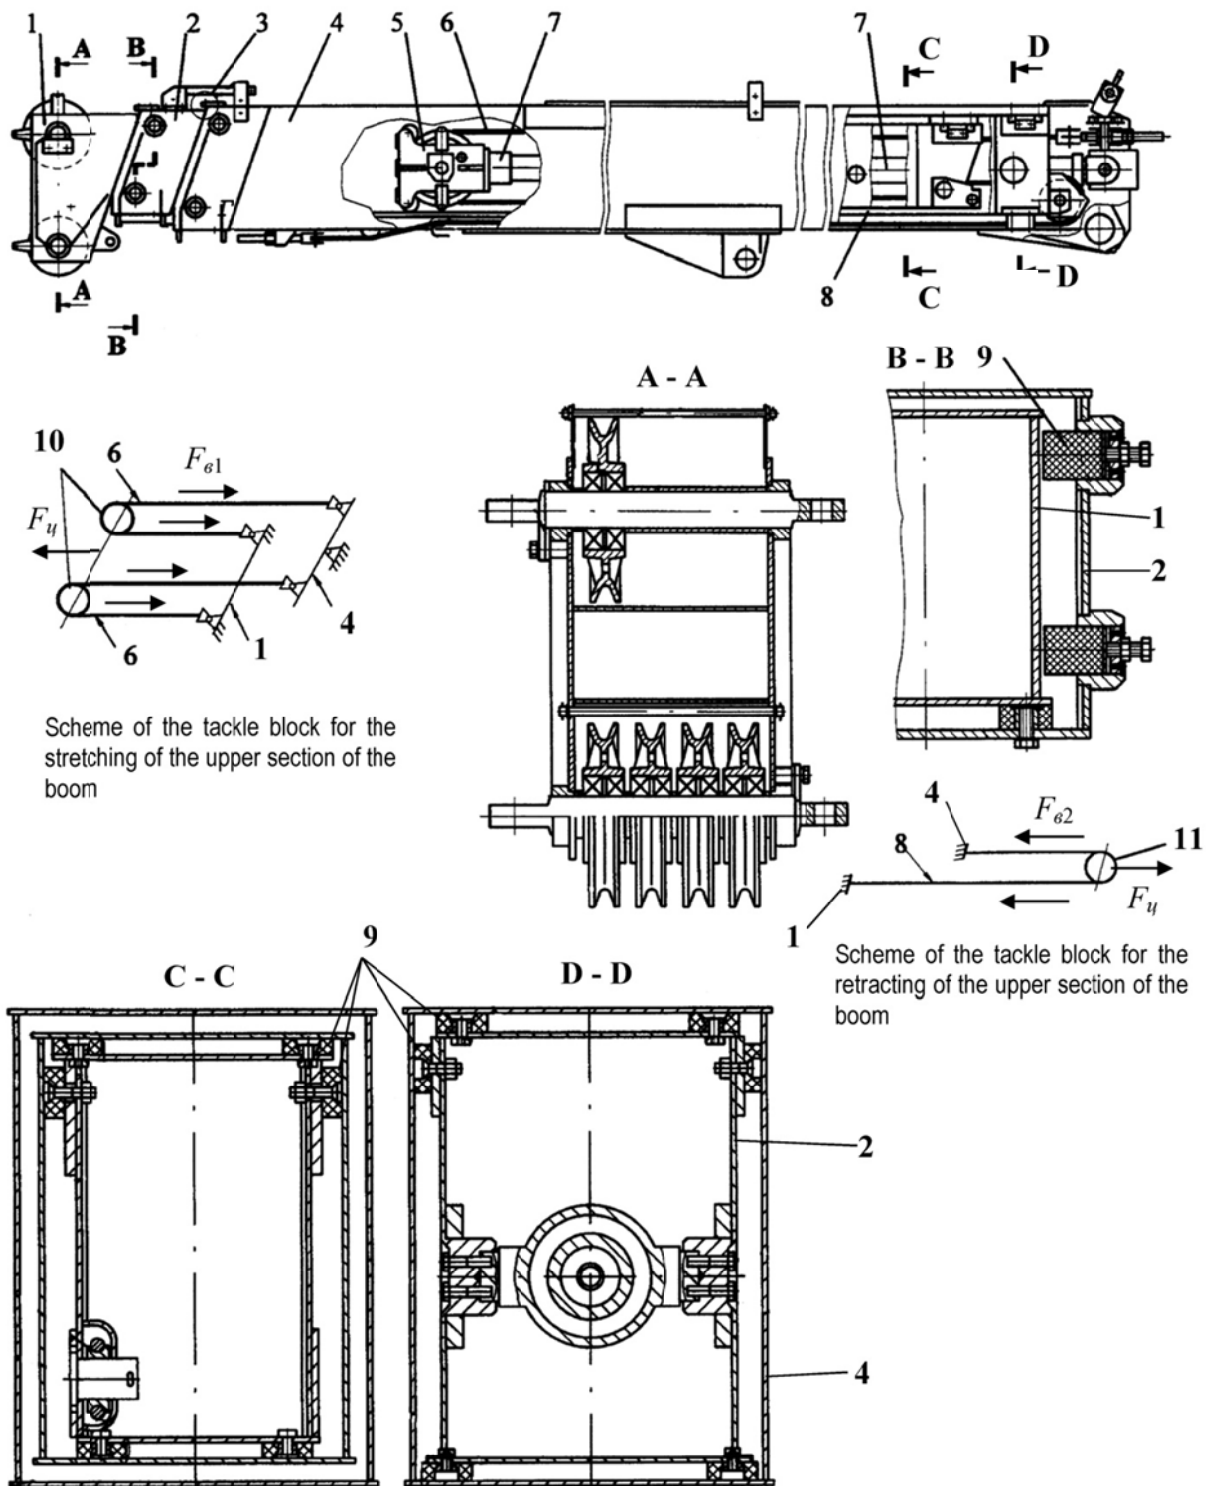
Telescopic boom of the truck mounted crane KS-45717
